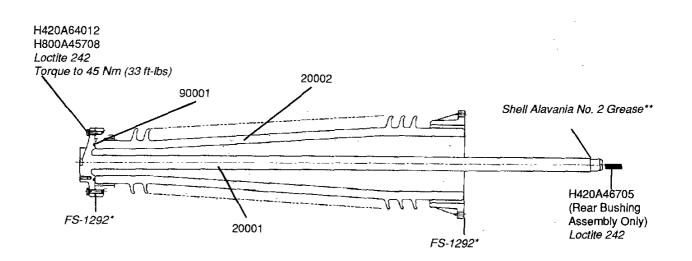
Entrance Bushing Assembly Front Bushing Assembly 20009 Rear Bushing Assembly 20010 (includes stud)
